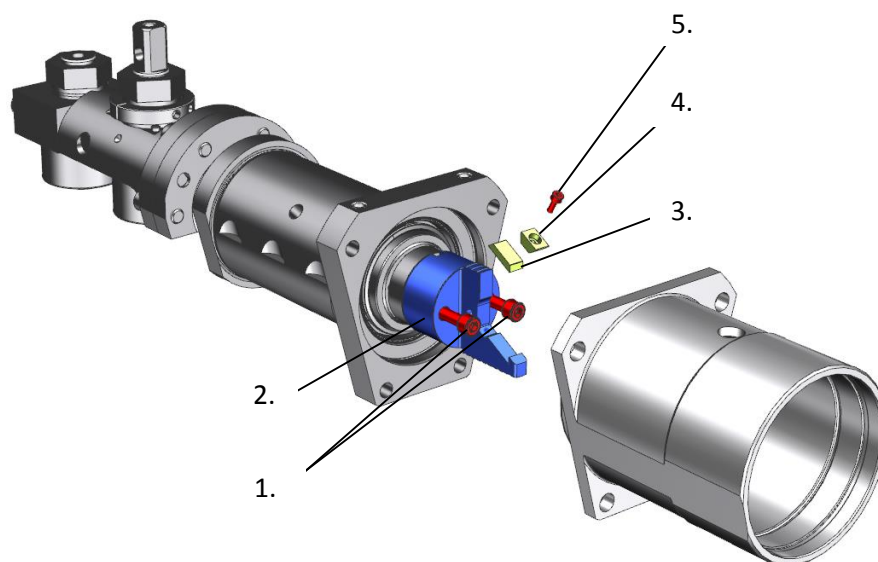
IBR Drive shaft with Carbide Insert Assembly
